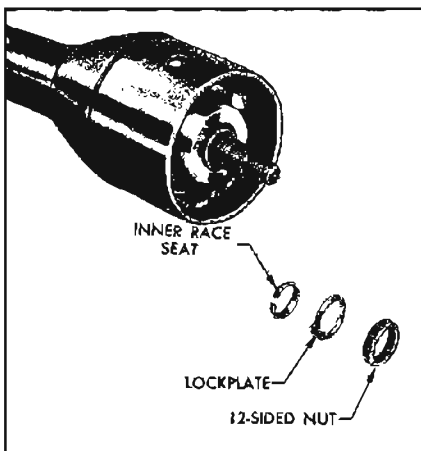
Removing 12-Sided Nut, Inner Race and Lockplate
